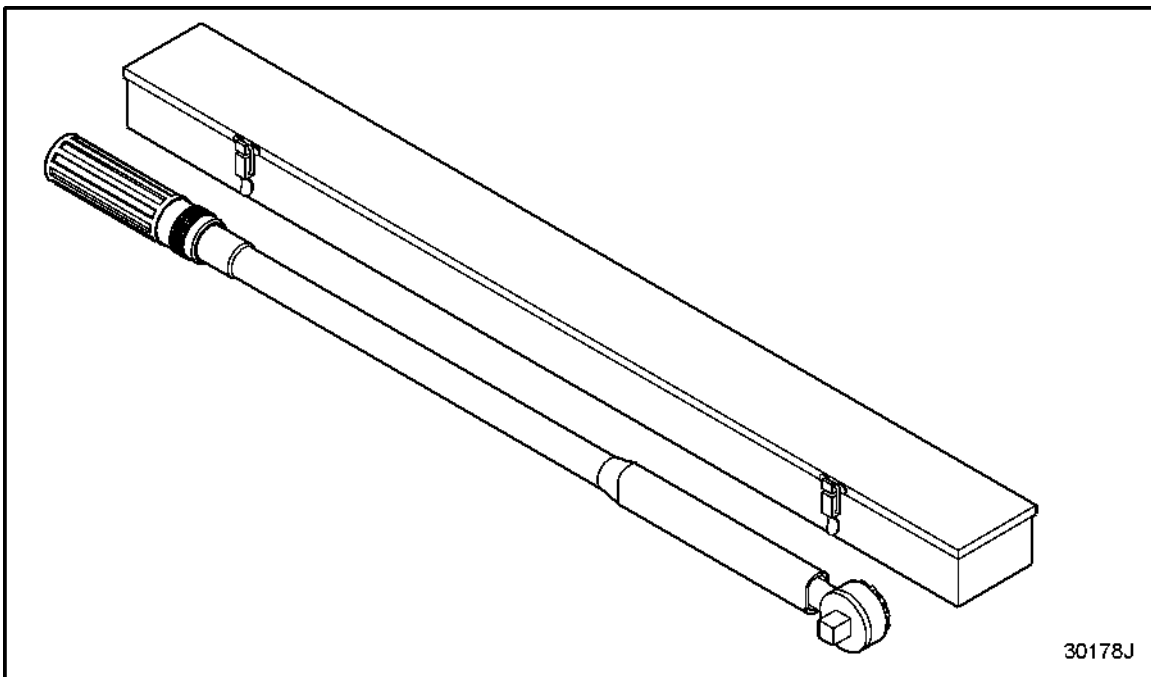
Adjustable Torque Wrench 3/8 in. Drive (10-250 lbs), J 24405
